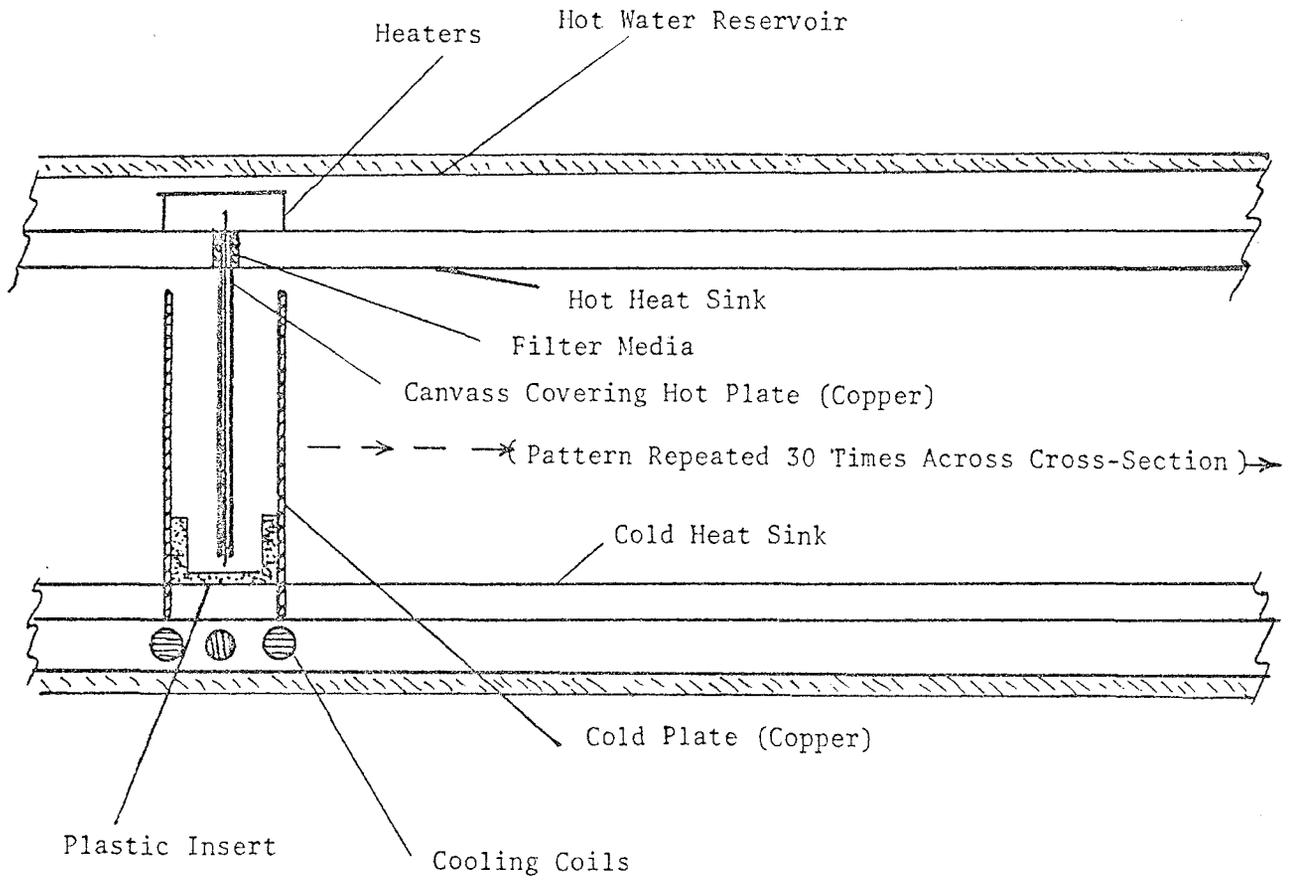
Construction Detail - End View of Conditioner Cross-Section, Final Version.
